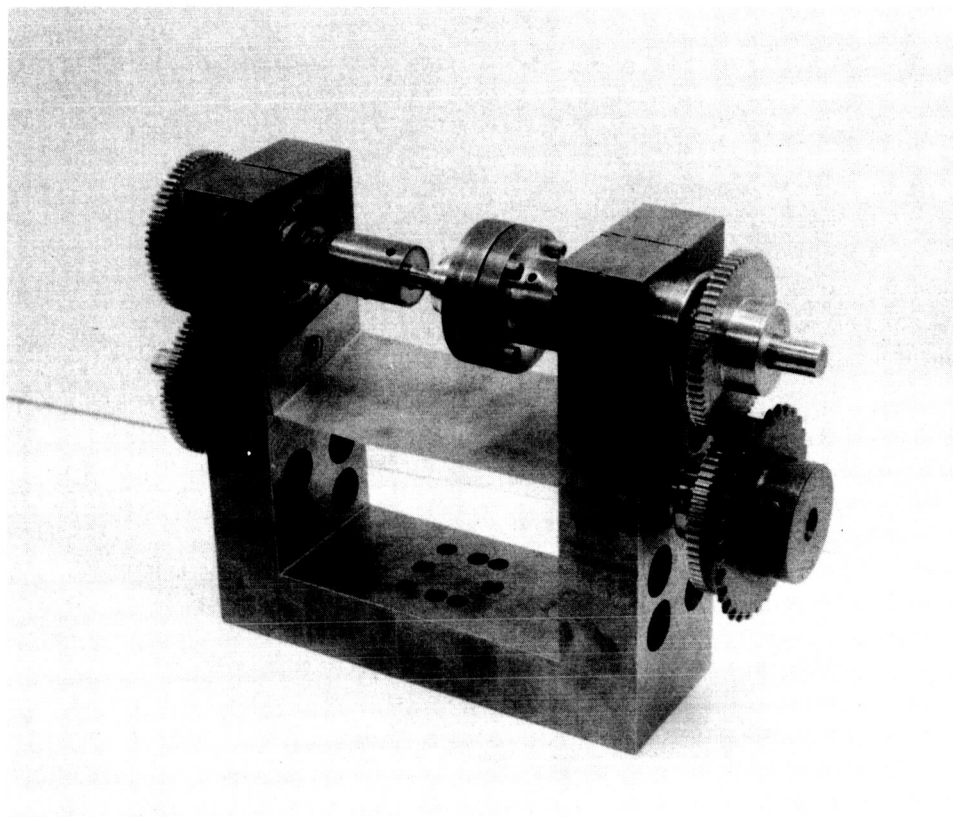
Emitter Assembly Ready for Electron Beam Weld.
